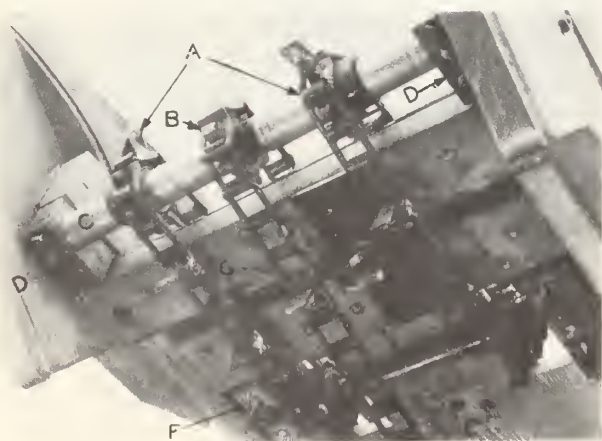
Lower end of the bale chute viewed from the underside. A, Pickup chains. B, Carrier chain. C, Lower pickup shaft. D, Lower pickup shaft bearings. E, Upper pickup shaft. F, Upper pickup shaft bearings slotted to tighten pickup chains. G, Lower bracket for tow bar.
